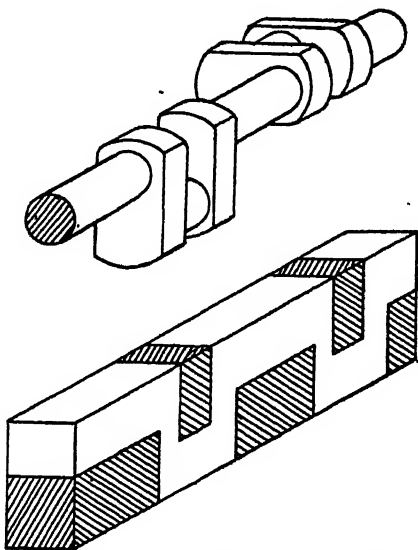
HOW A CRANK-SHAFT IS MADE.
